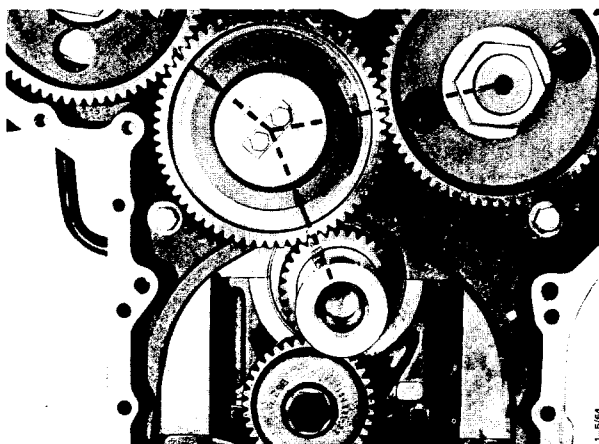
Adjustment of timing-gear wheels before idler gear is taken out
